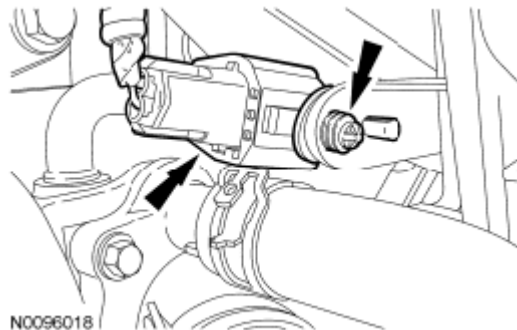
Locating KS Electrical Connector & Wiring Harness Pin-Type Retainer
